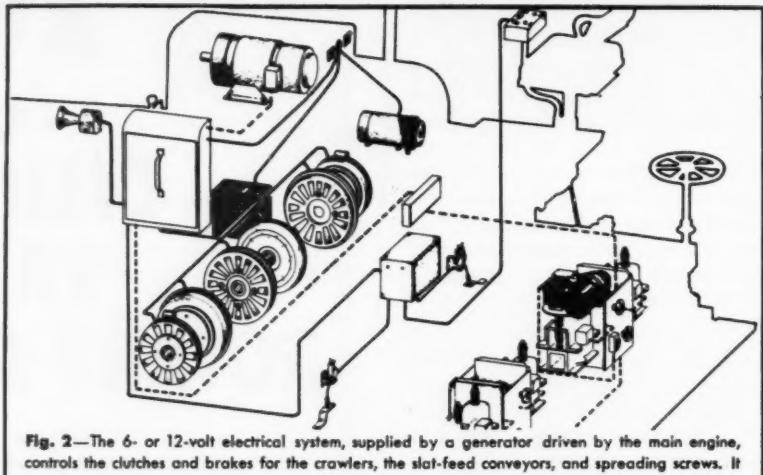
The 6- or 12-volt electrical system, supplied by a generator driven by the main engine, controls the clutches and brakes for the crawlers, the slat-feed conveyors, and spreading screws. It prevents operation of the conveyors and screws in reverse gears, controls the automatic system, and powers the engine starter and lights.
